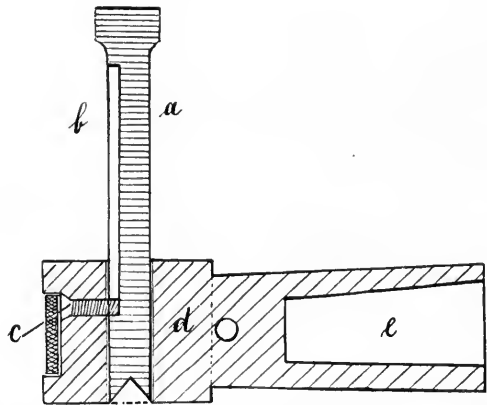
Vertical section through a bolt apparatus, according to Kögler: a, bolt; b, groove; c, screw for the bolt; d, iron middle cylinder; e, eye for opening the wooden handle.
